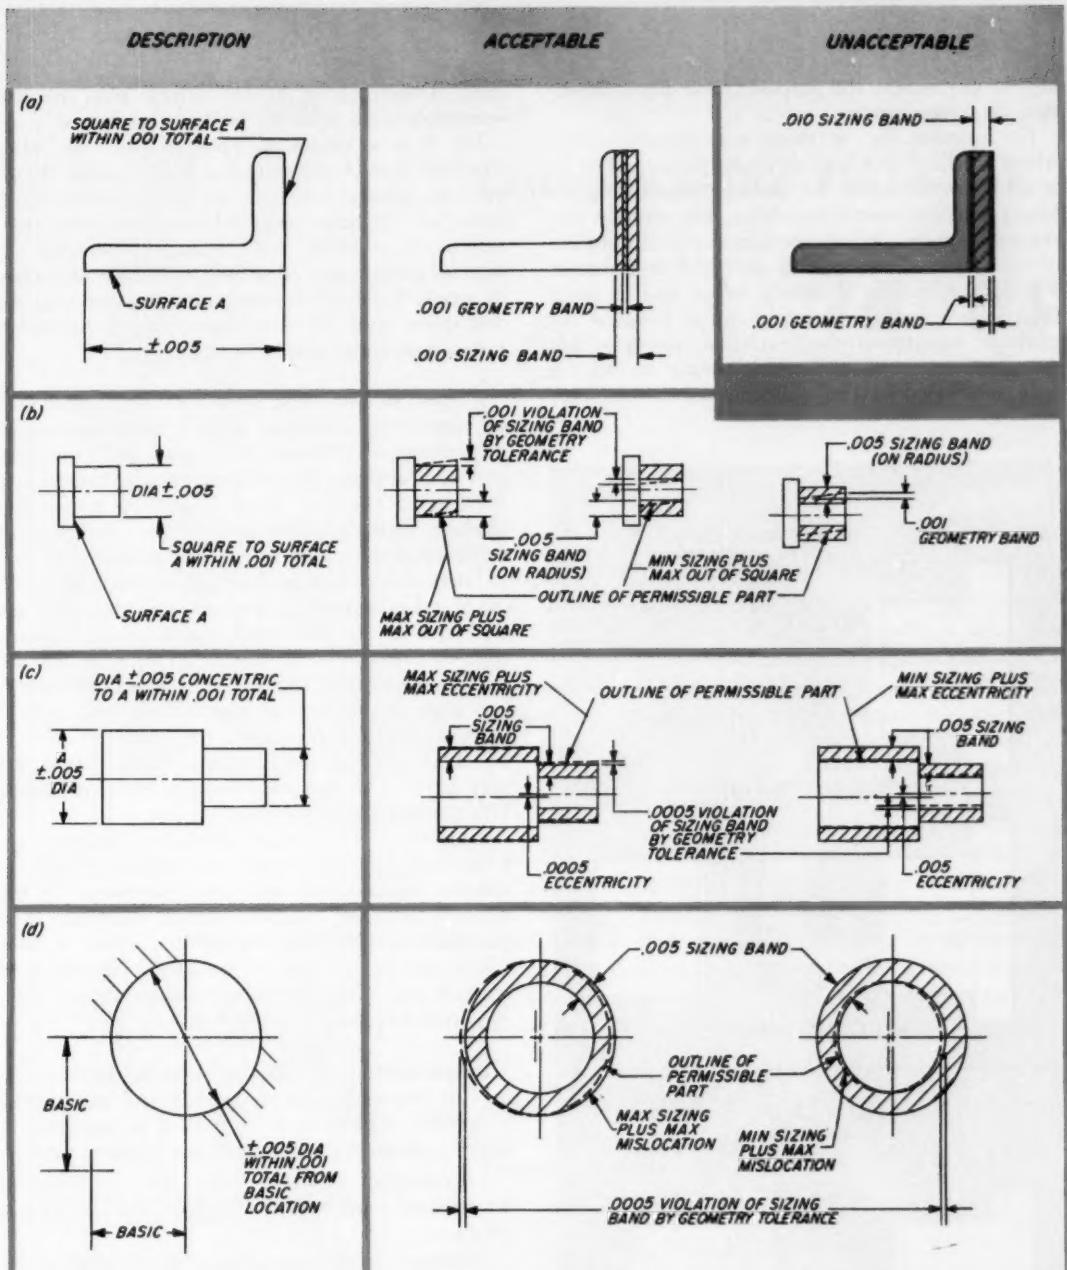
Where there are one or more datum features, geometry dimensions may allow parts to exceed certain sizing dimensions.
